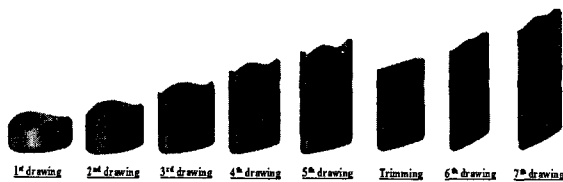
Deformed shapes of the blank at each deep drawing stage
